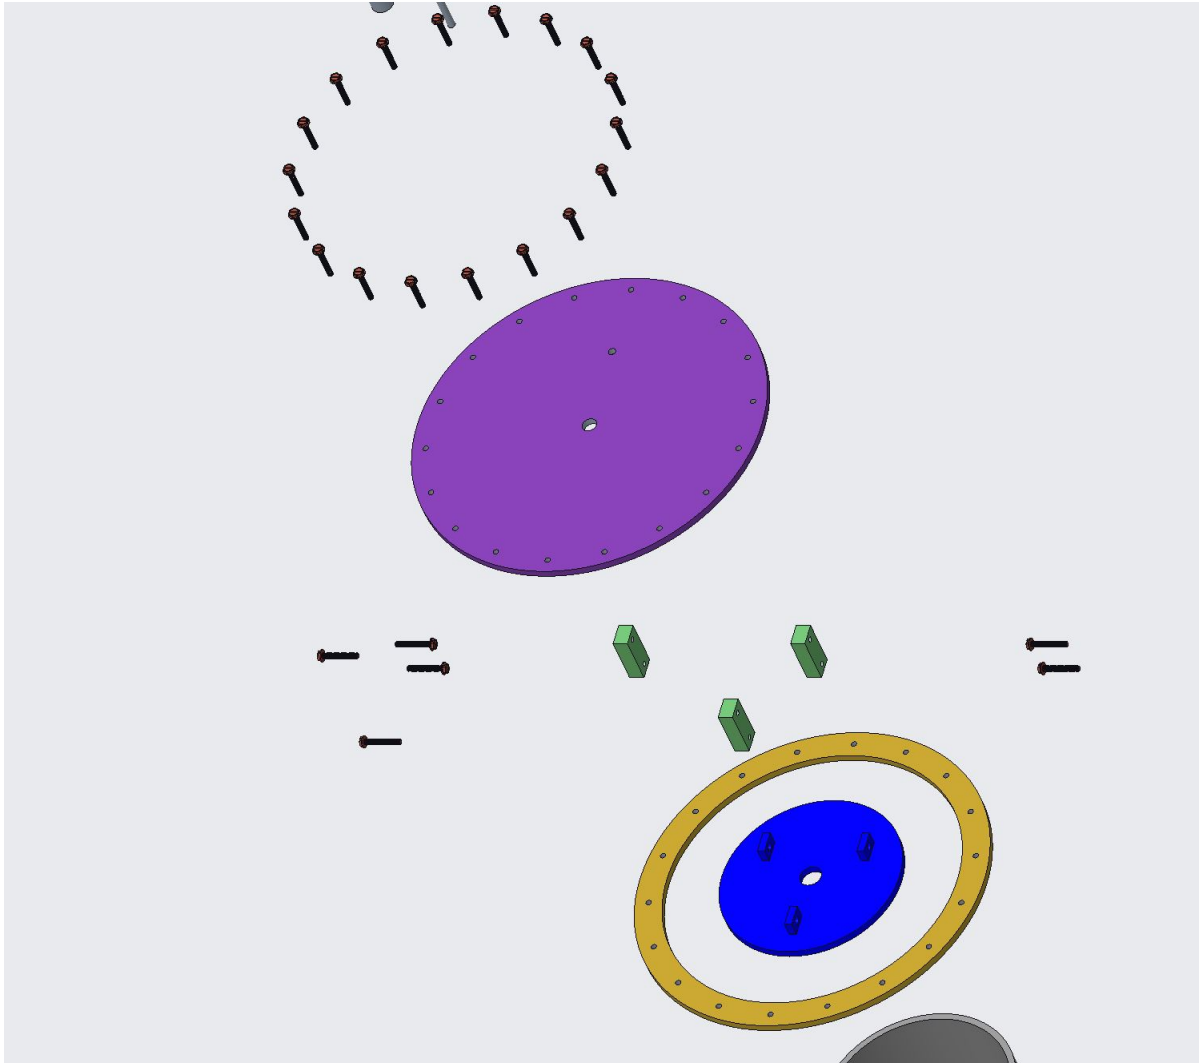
Exploded view, Zoom of G10 and Lid Assembly
